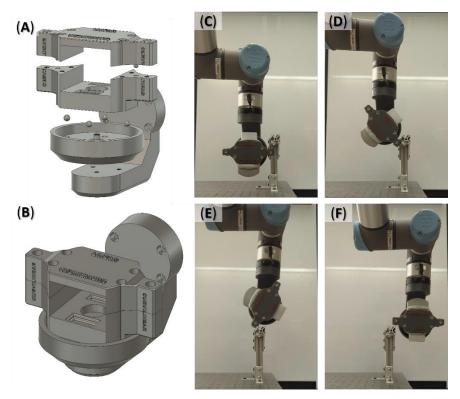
Overview of The Dual-End Design ultrasound probe holder. Engineering diagram of The Dual-End Design in (A) exploded view and (B) assembled view. (C-F) The design can swap between linear and curvilinear transducer by rotation around a horizontal bar.
